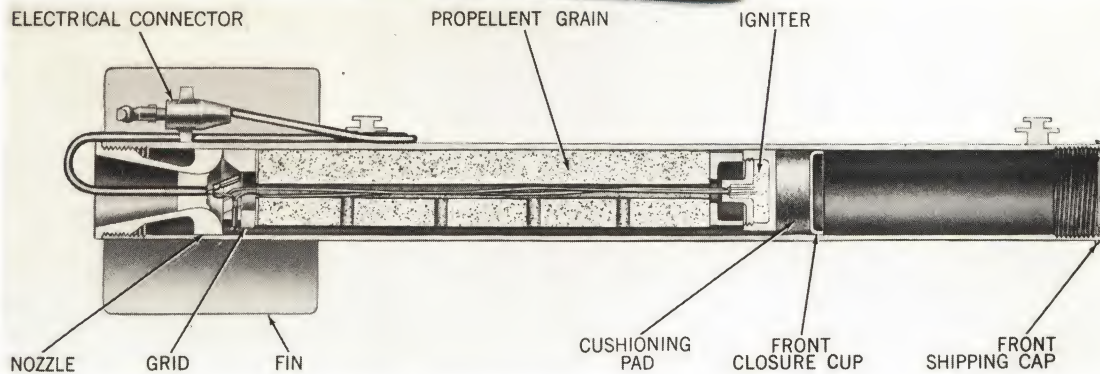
2.25-Inch Rocket Motor Mk 16 Mod 6, Cross Section.
